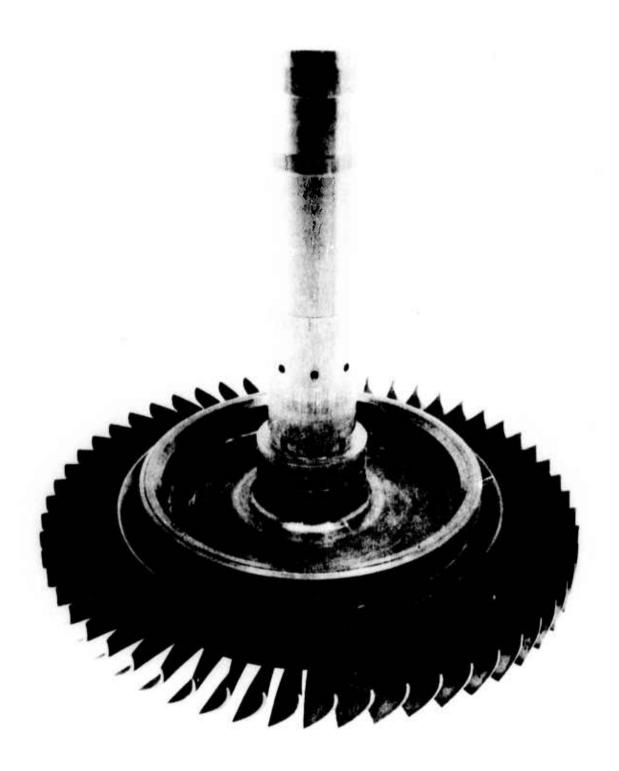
Enlarged Cooling Air Holes in Turbine Shaft.
